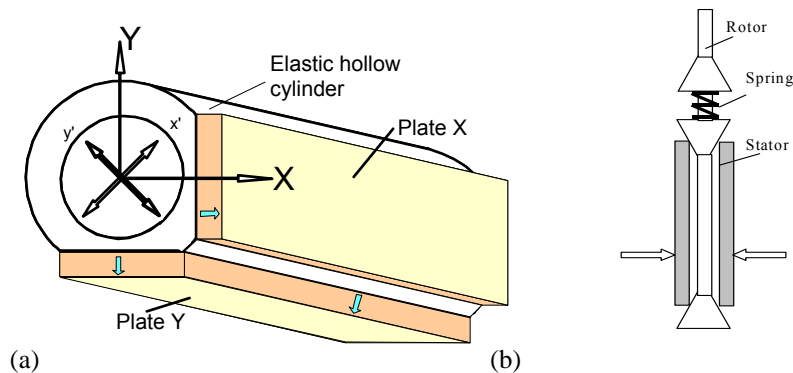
(a) Structure of a metal tube stator, and (b) assembly of the motor.
